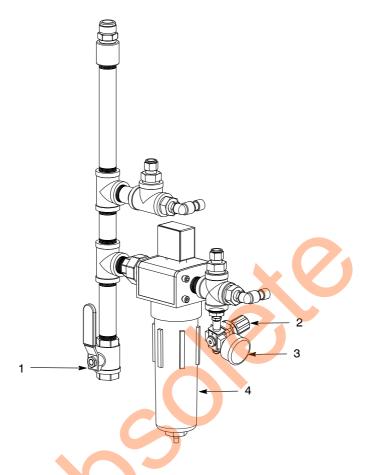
Air Header Assembly. View Depicts Configuration for Latch-Side Installation, Without Feed Center.
